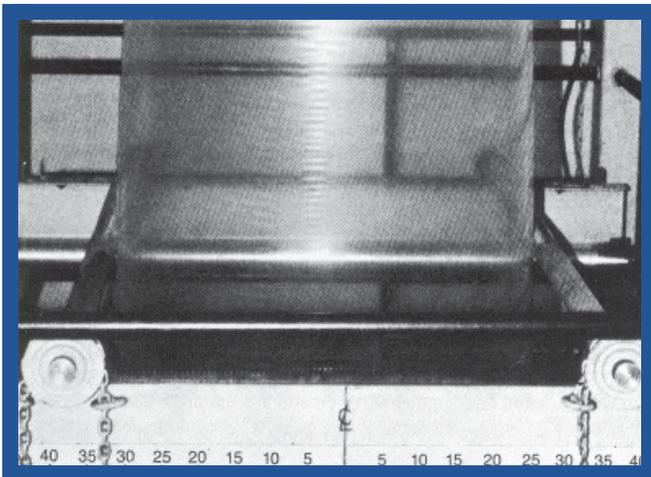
Graduation on beam aid adjustment of bubble stabilizer bars. Drag causes wrinkles.
